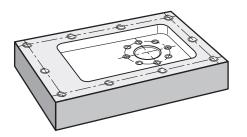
Example workpiece - drilling a bolt hole pattern and a row of holes
